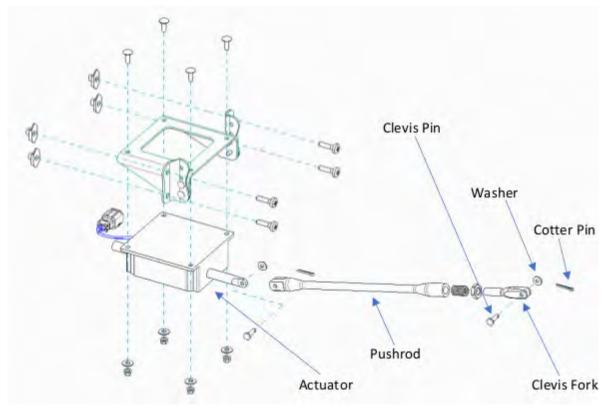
PITCH TRIM ACTUATOR ASSEMBLY
